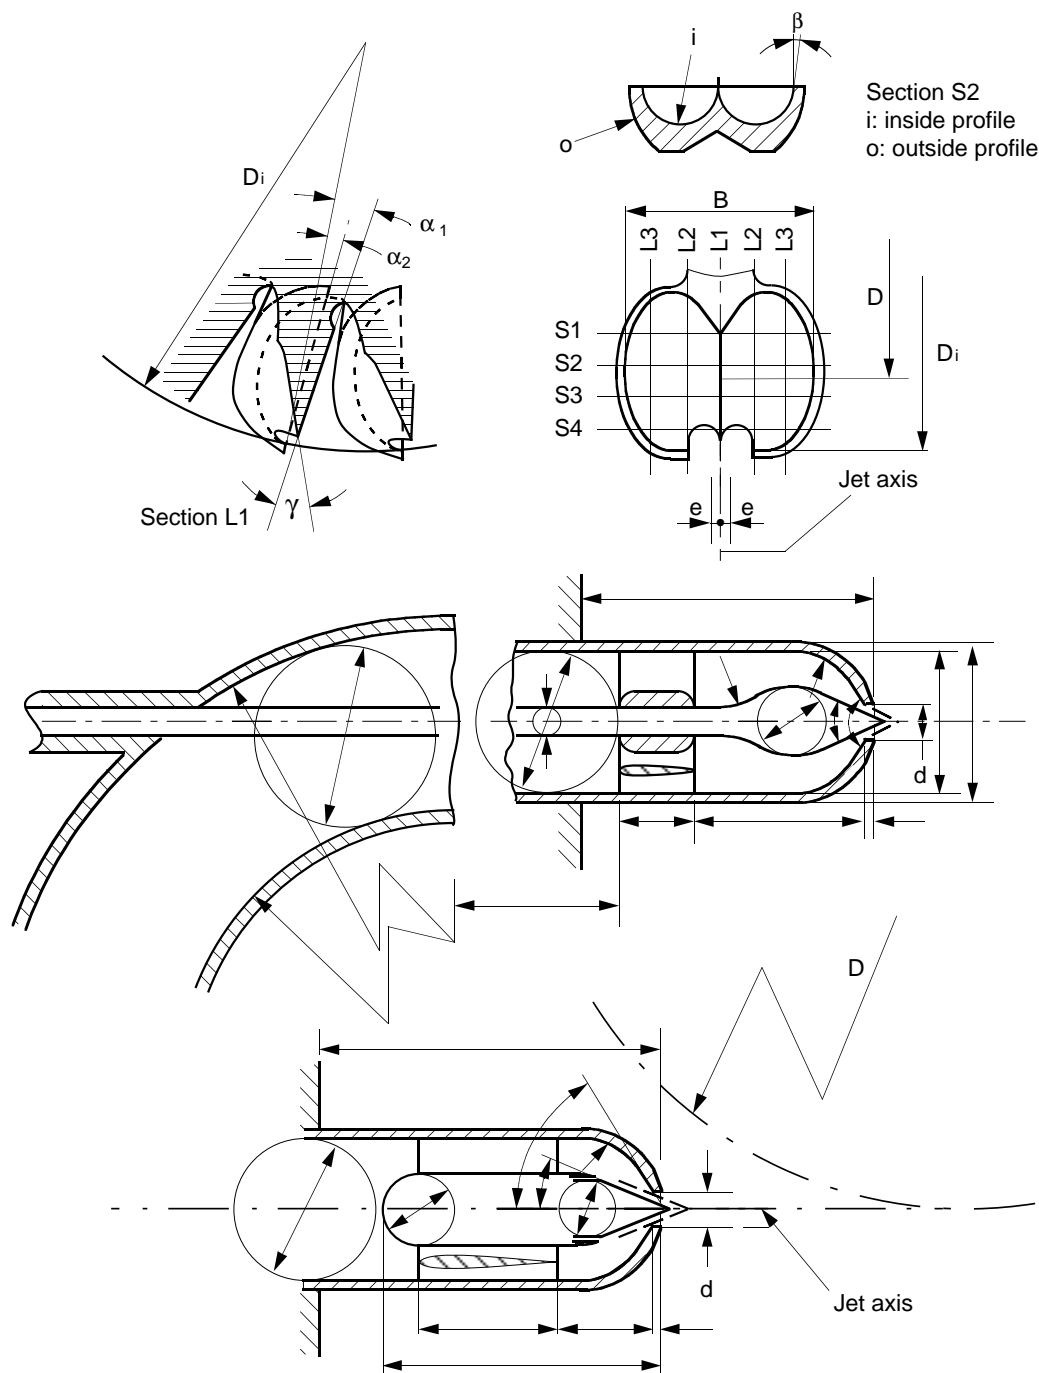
Pelton turbine: Example of dimensions to be checked on the buckets and nozzles
